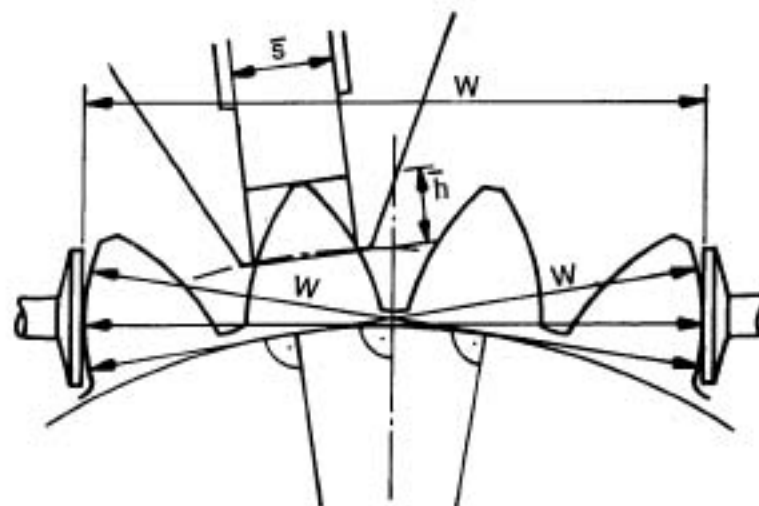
Tooth checking by chordal tooth thickness and span measurement methods
